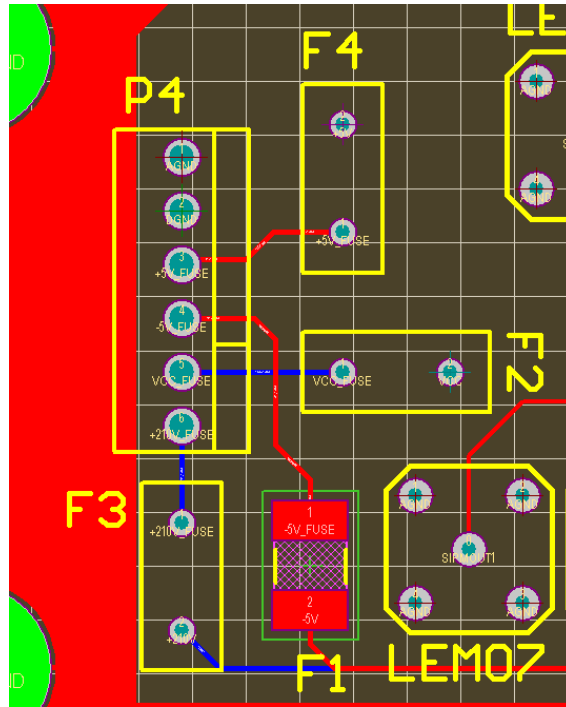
Close-up CAD drawing of backplane showing the power connector (P4) and power supply fuses. F1=-5V, F2=VCC, F3=+60V, F4=+5V
